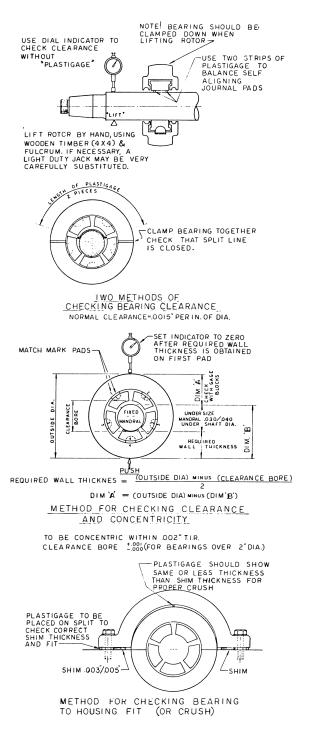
Checking Methods for Self-Aligning Tilting Pad Journal Bearings.
